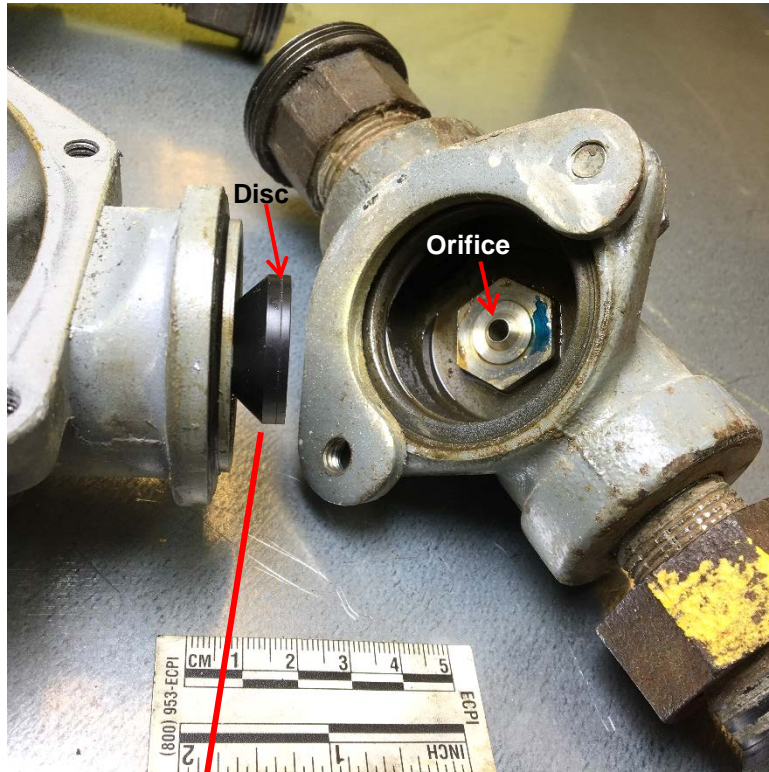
Various views of the disassembled one-piece disc from gas regulator assembly #4. As can be seen in this photograph, the construction of the Schlumberger gas regulator assembly is different compared to that of the Reynold gas regular assembly.
